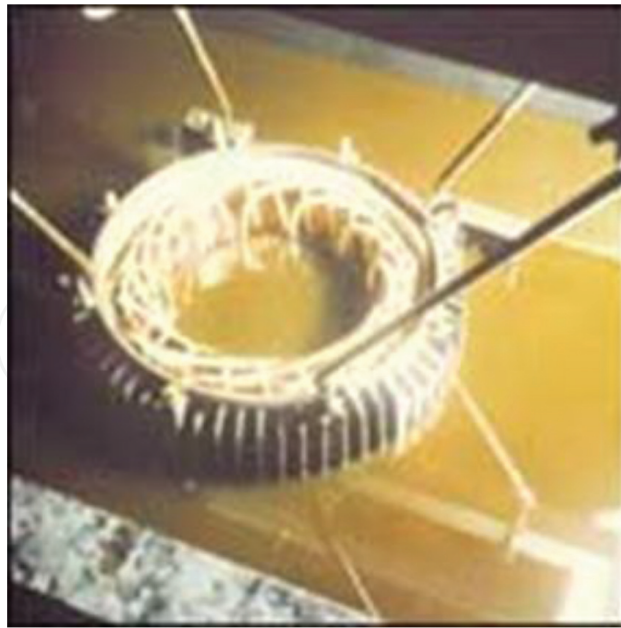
Insulation of stator assembly with polyester resin using dip or flood impregnation (courtesy from Elantis electrical insulation pvt ltd.).
